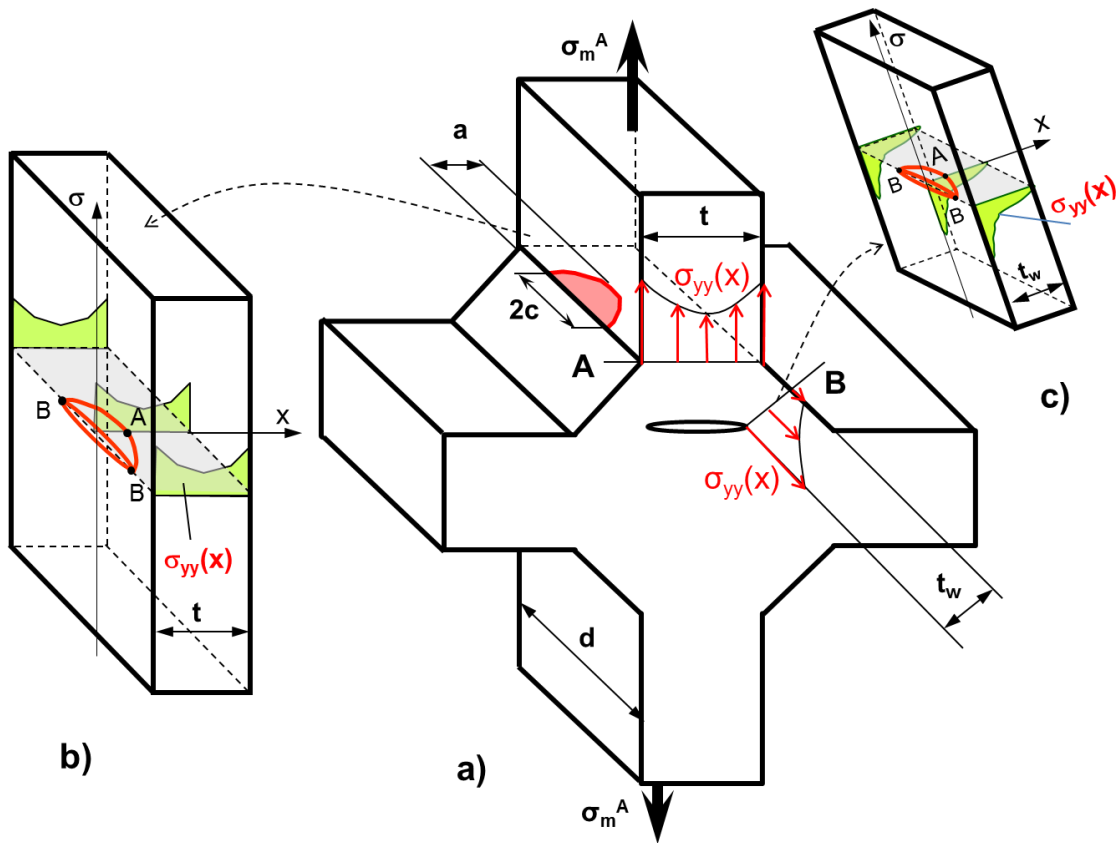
Critical locations in a cruciform weldment; a) general geometrical configurations of the joint, b) crack model for the failure from the toe (section A), c) crack model for the failure from the weld root (section B)
